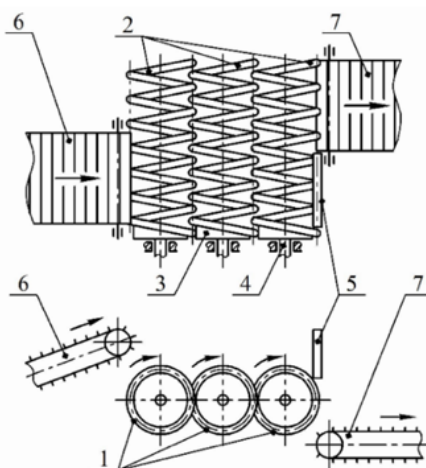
Scheme of the spiral potato separator: 1 – cleaning rollers; 2 – spiral springs; 3 – hubs; 4 – drive shafts; 5 – protective screen; 6 – loading conveyor; 7 – unloading conveyor.
